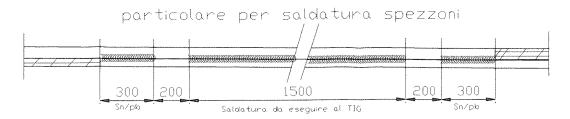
Internal splices (extracted from the original Ansaldo drawing): 1500 mm weld of aluminum edges + 200 mm gap + 300 mm solder of aluminum faces on both sides of the weld. The welding was done with the TIG (Tungsten Inert Gas) technique.
